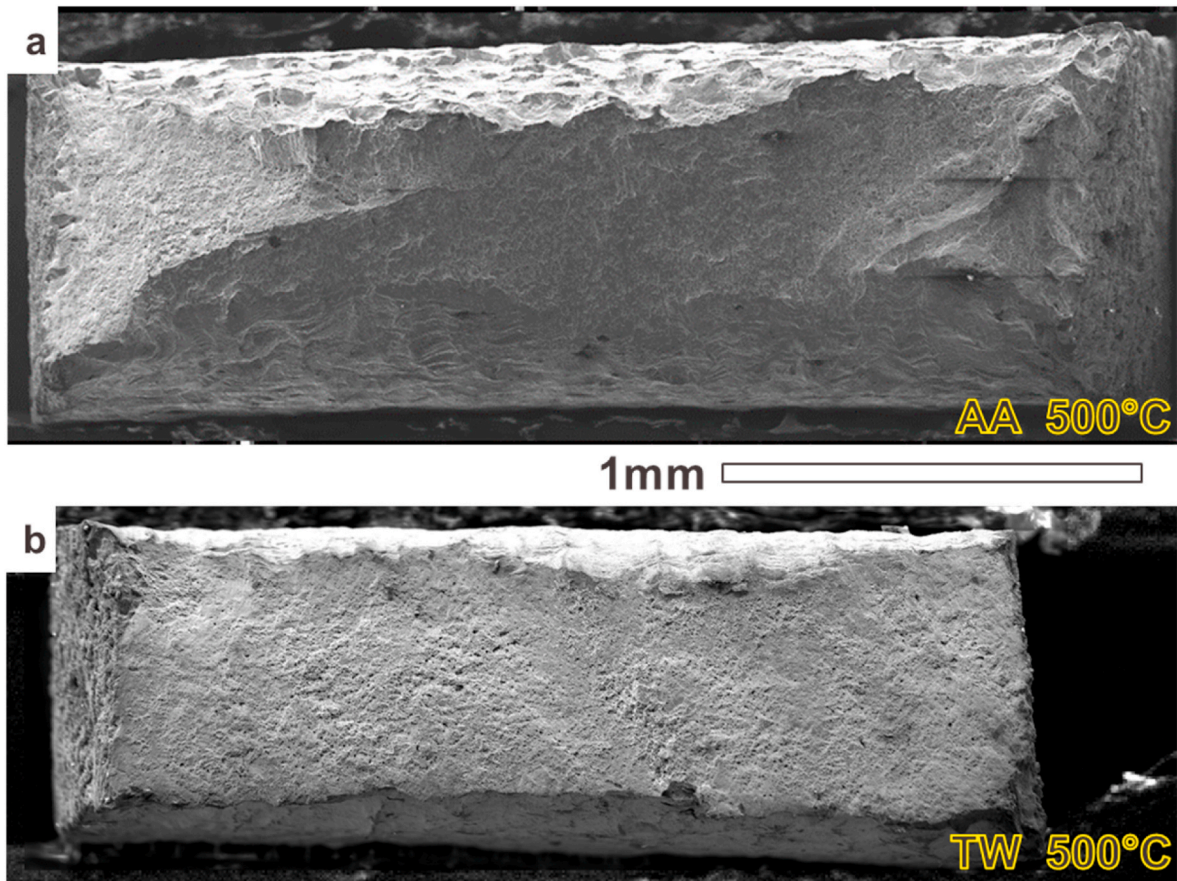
Fracture surfaces of the samples deformed to failure at 500 °C for a) the AA and b) TW conditions, depicting that the AA samples shows necking and a cup and cone fracture surface, while the TW samples has a flatter fracture surface.
